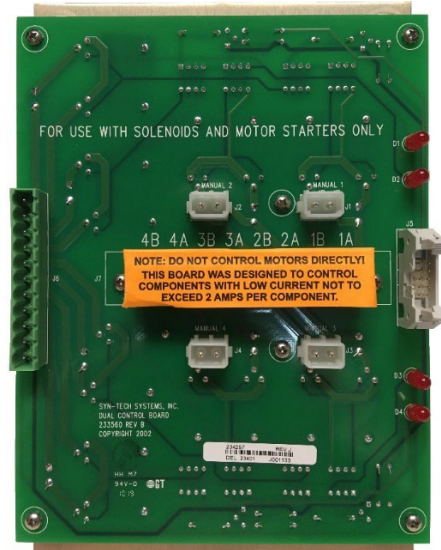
Dual Control Relay Board Assy, 2A, (234257)
